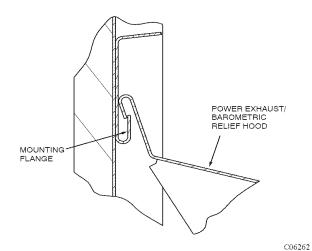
Barometric Relief/Power Exhaust Hood Flange
